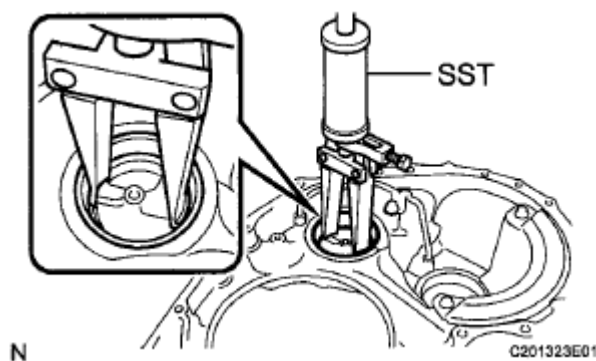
Removing Counter Driven Gear Front Tapered Roller Bearing Outer Race
